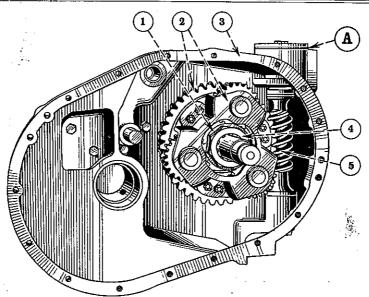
Illustration No. 56 Sprocket drive gear case, showing worm gear and worm.
